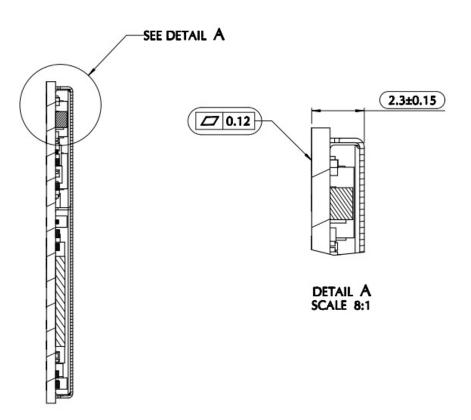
LE910C1-SV and SVX Mechanical Dimensions (Side view)
